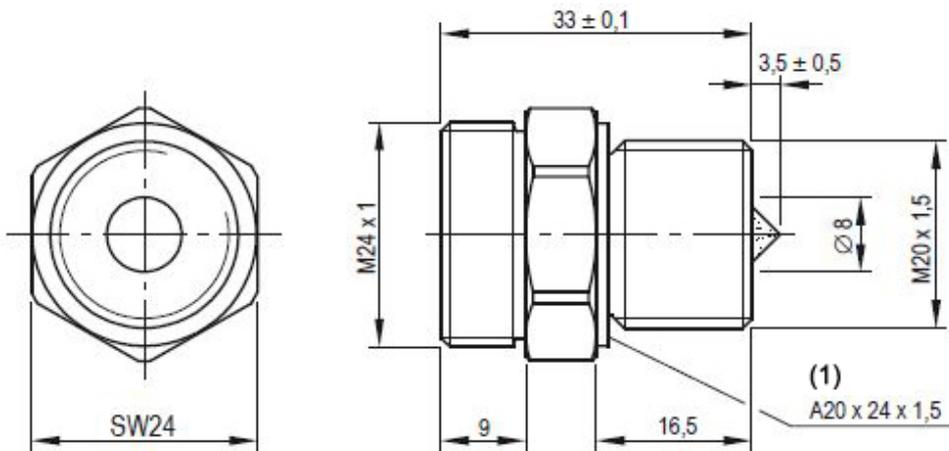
Dimensions (in mm), M20 x 1.5 mm, short
